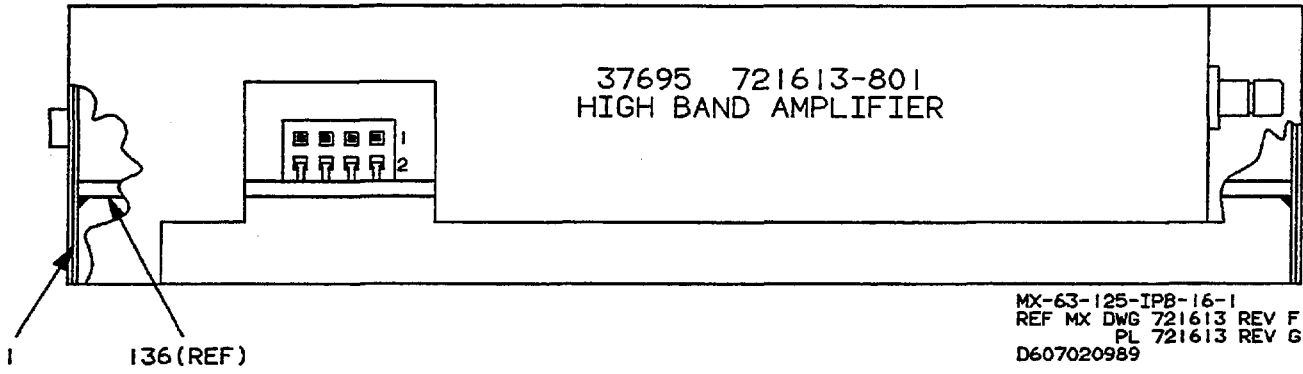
High Band Amplifier Module Assembly (Sheet 1 of 4)
